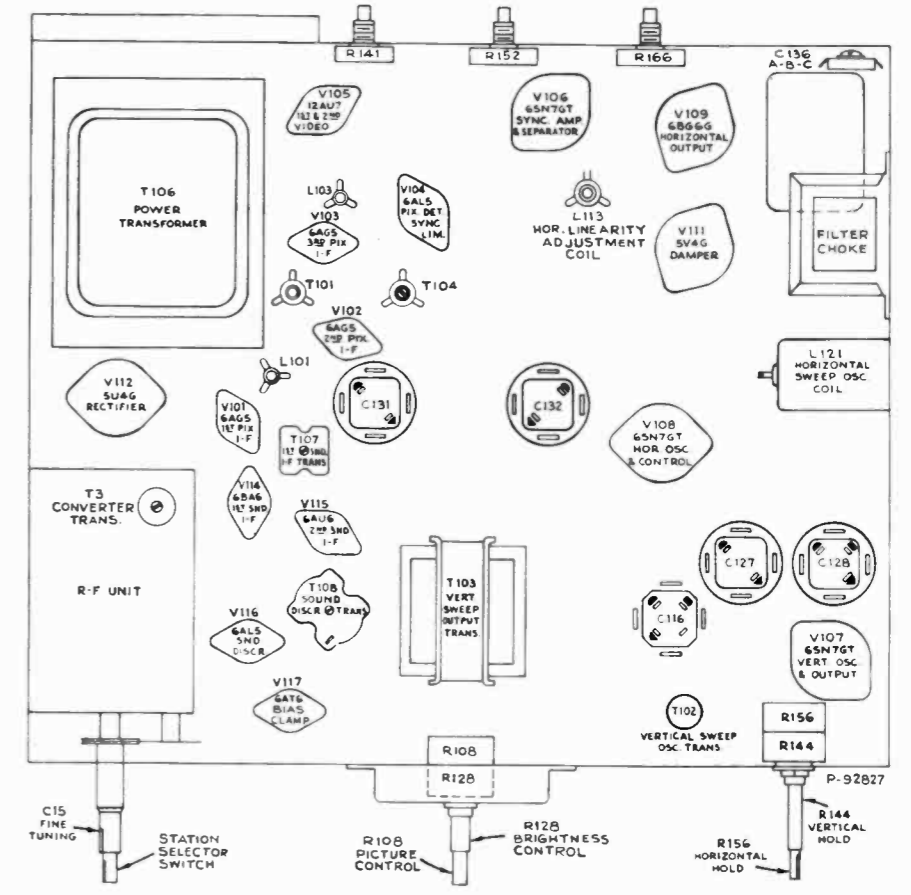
Chassis Bottom View (Showing Location of Major Components)
